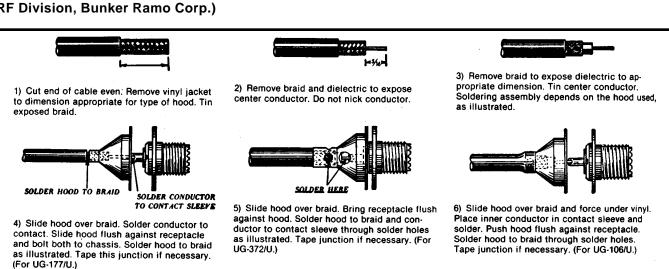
Assembly of the 83 series (SO-239) with hoods. Complete electrical shield integrity in the UHF female connector requires that the shield be attached to the connector flange by means of a hood.
